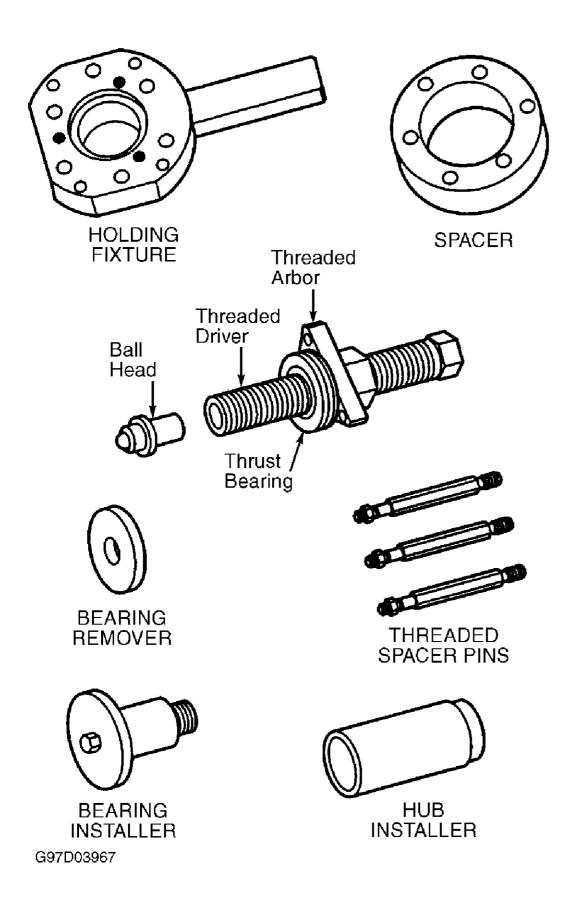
Rear Wheel Hub & Bearing Removal & Installation Tools Courtesy of GENERAL MOTORS CORP.
